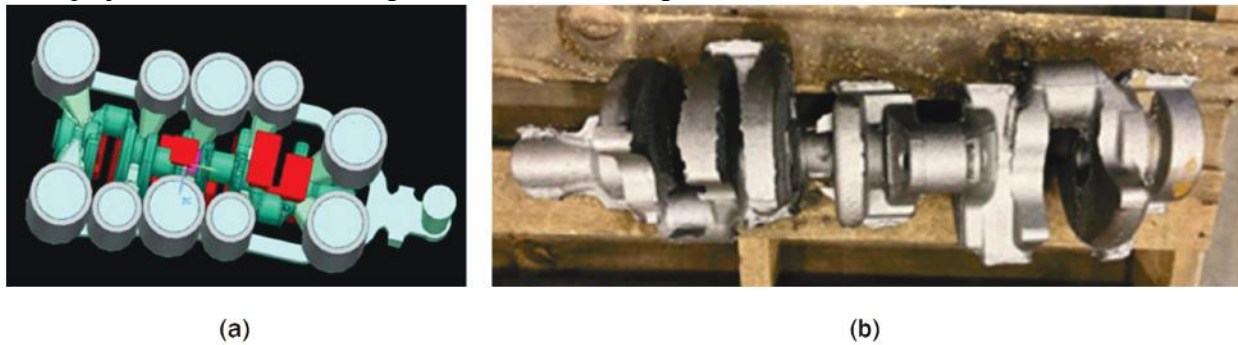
(a) New cast steel crank casting design and (b) a PHASE 2 crank. Source: GM.
